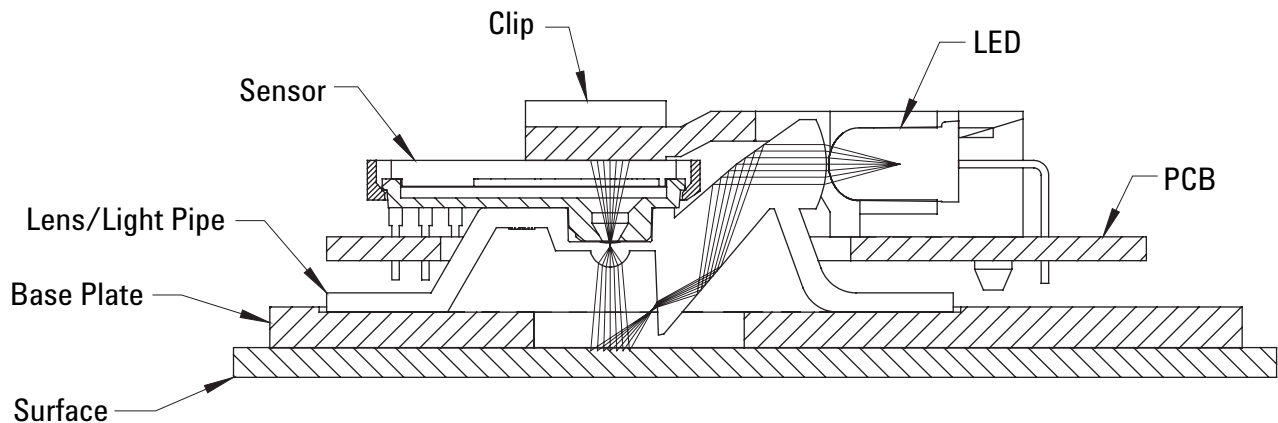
Sectional view of PCB assembly highlighting all optical mouse components (optical mouse sensor, clip, lens, LED, PCB, and base plate).
